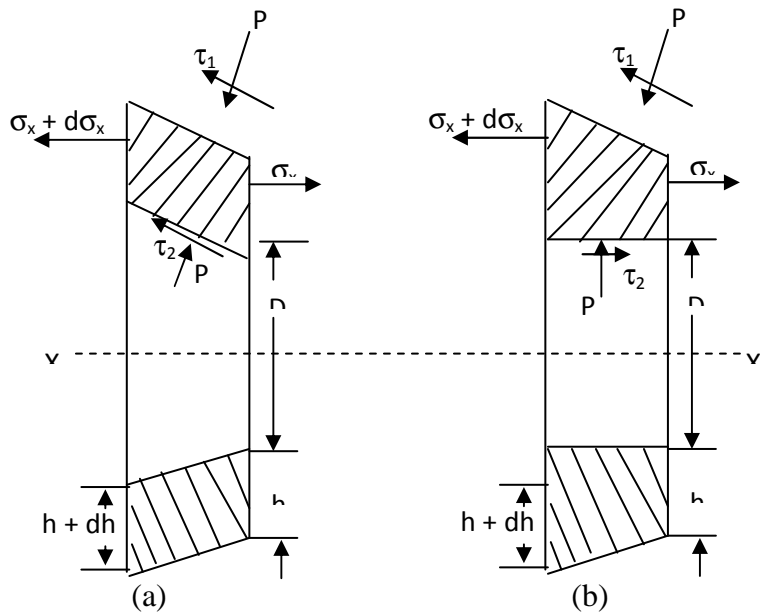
Diagram showing stresses acting on a differential element during tube drawing. (a) with slightly tapered plug (b) with a moving mandrel
